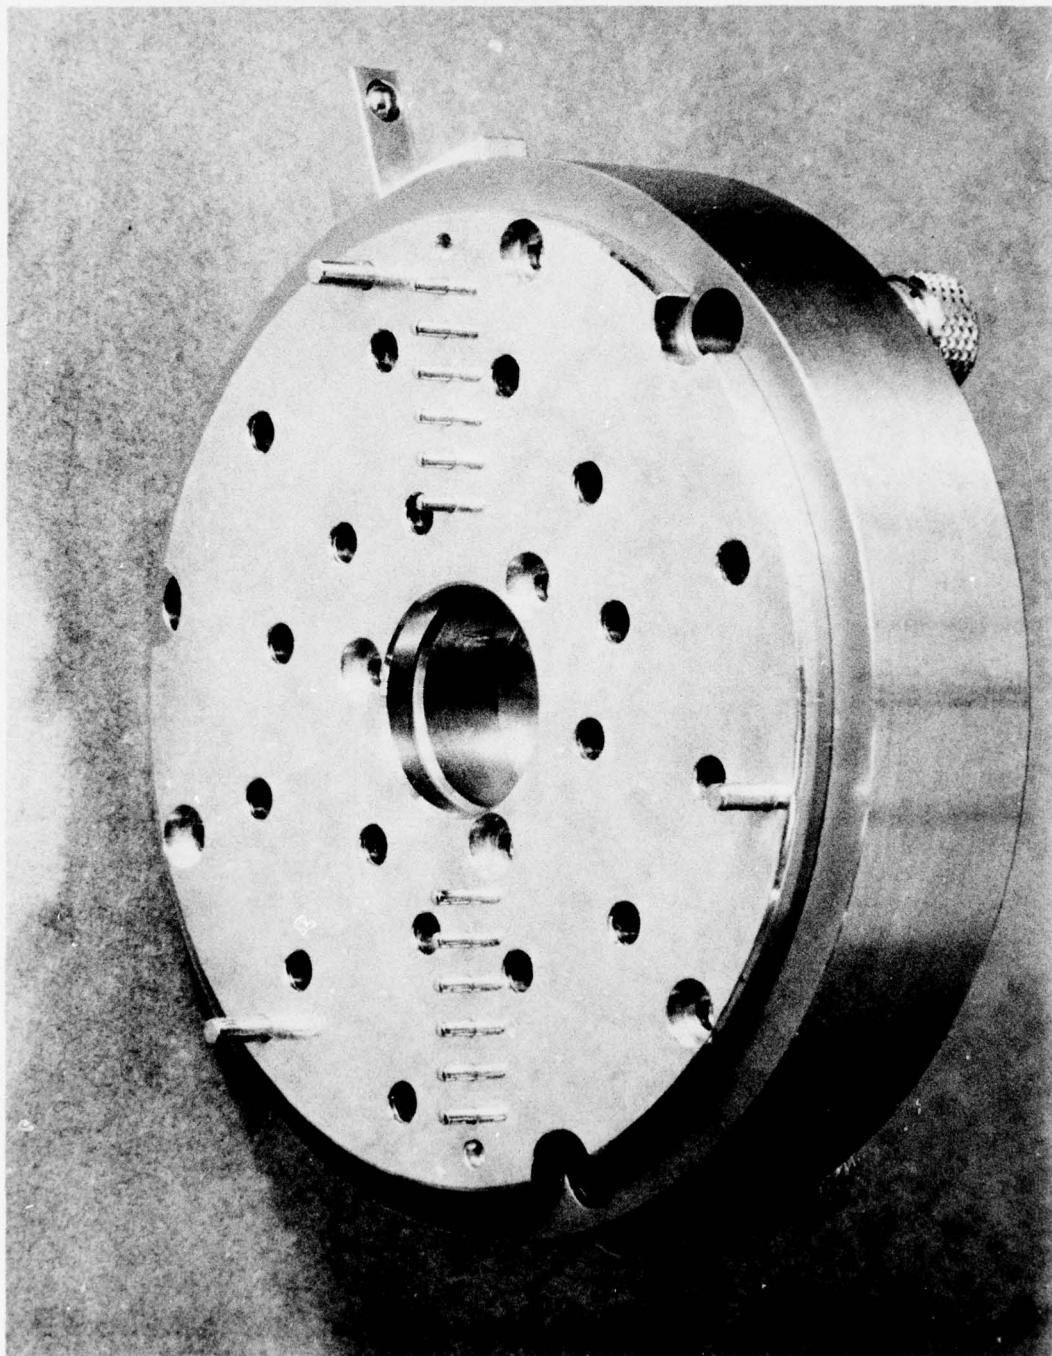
VIEW OF CAGE AND SUPPORT PLATE OF FLEXIBLE THRUST BEARING LLF-1T, SHOWING LOCATING PINS OF RINGS AND ANTI-ROTATION PINS OF SPIRALLY GROOVED MEMBRANE
